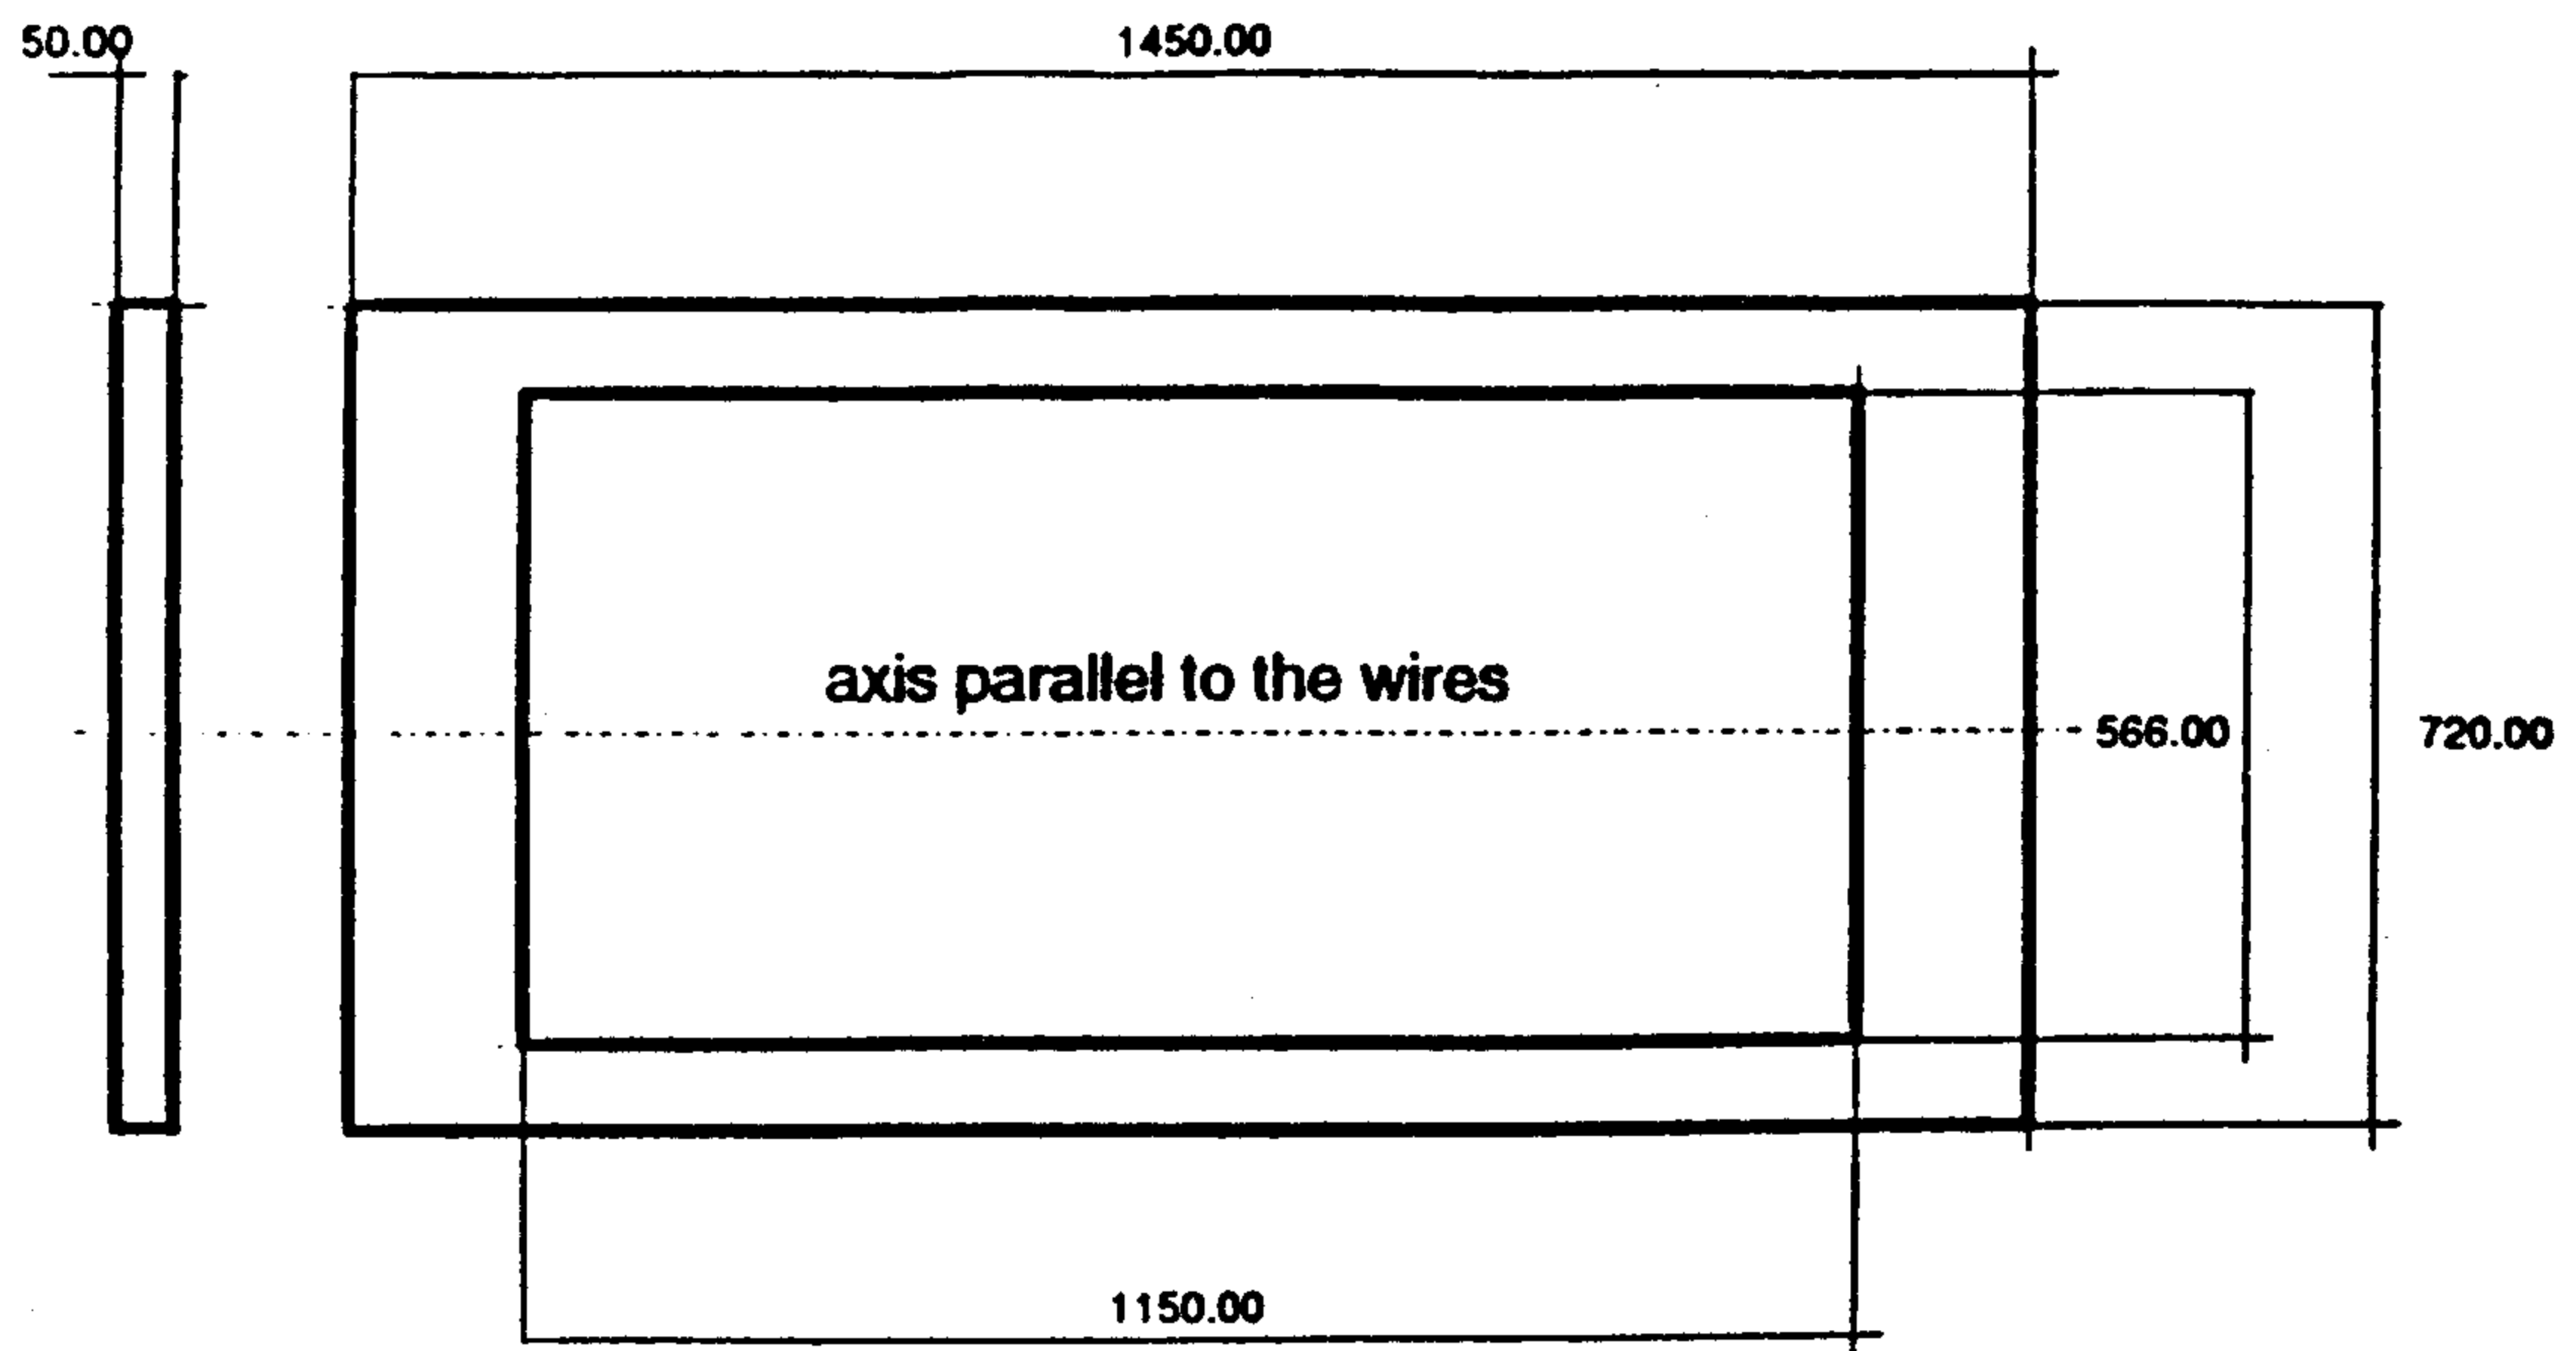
Dimensions of the Drift Chamber Prototype.
